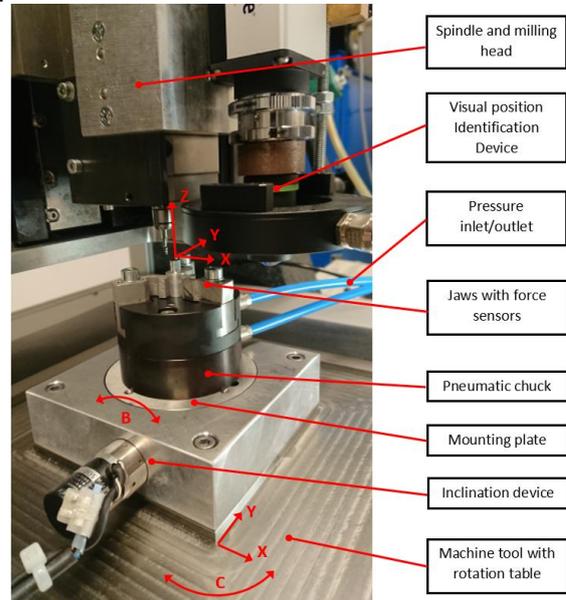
The main components of the investigated clamping system mounted on a highly accurate CNC machine
